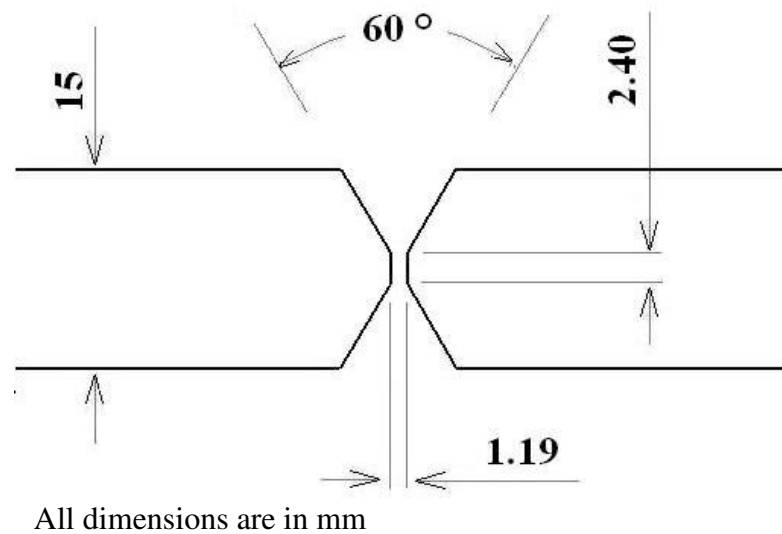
Weld joint design for preliminary factorial tests.
